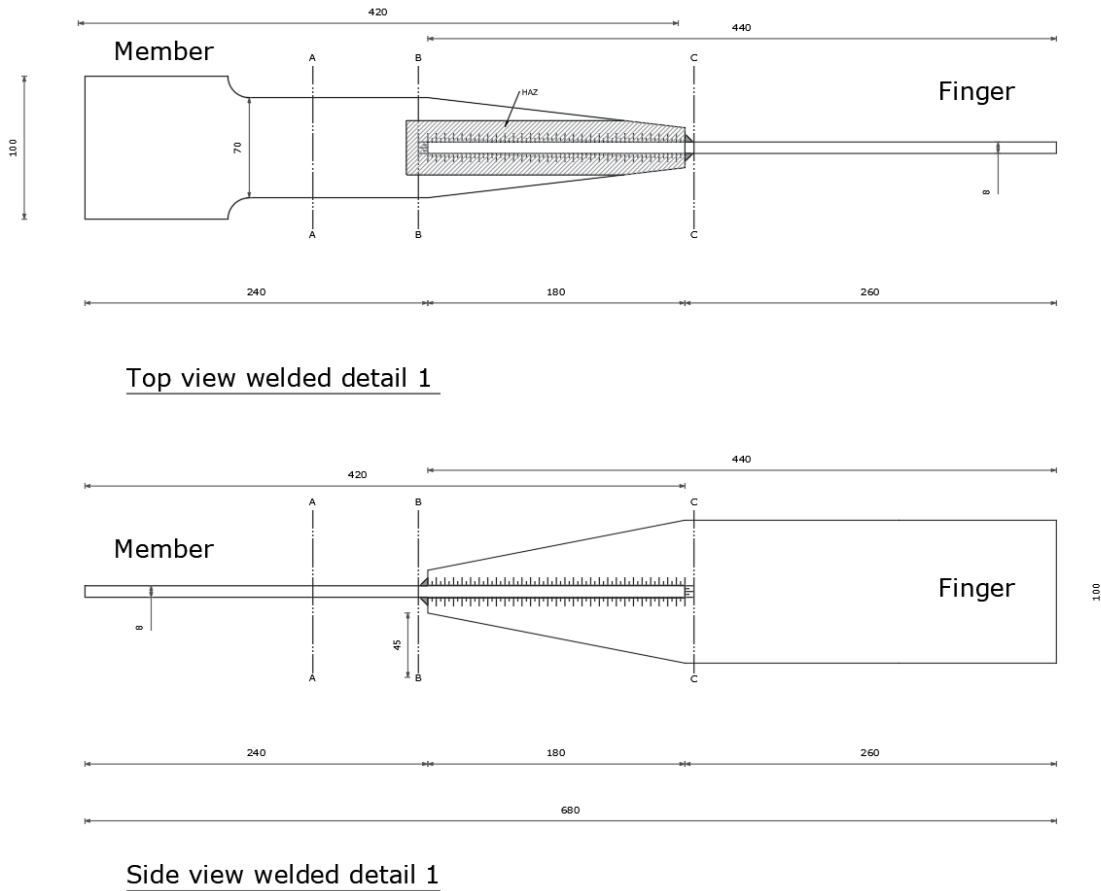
Dimensions of welded cruciform variant 1.
